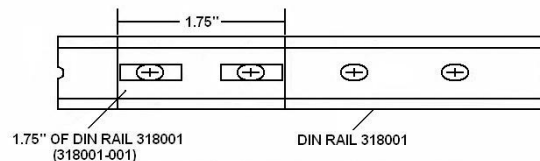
Typical mechanical detail of mounting DC power supply in D/T and L Cabinets
